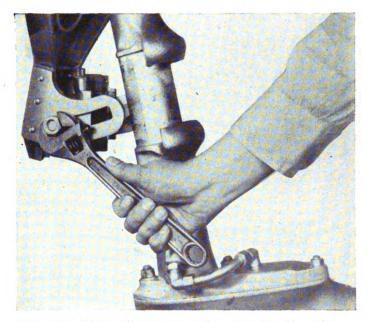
Tightening thrust-socket nut after line of propeller drive is adjusted correctly.
